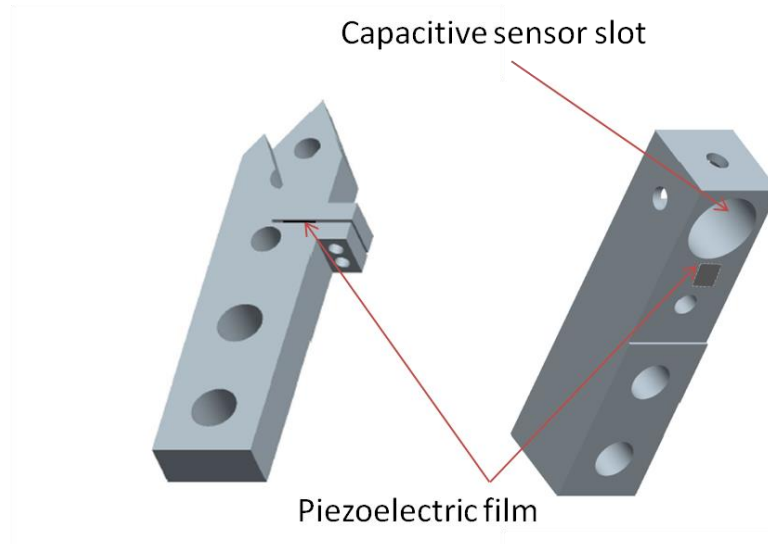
The design of upper part (left) and base part (right) of the smart cutting tool
